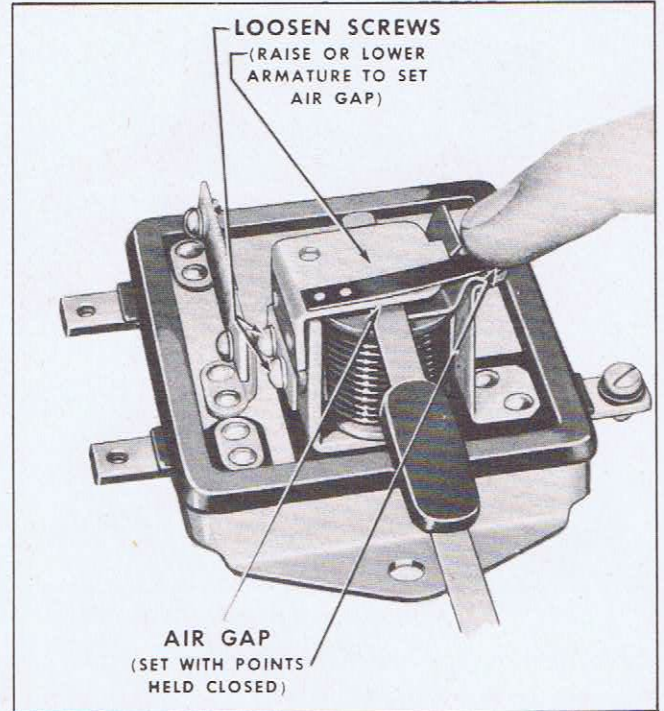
CUTOUT RELAY AIR GAP CHECK AND ADJUSTMENT.
